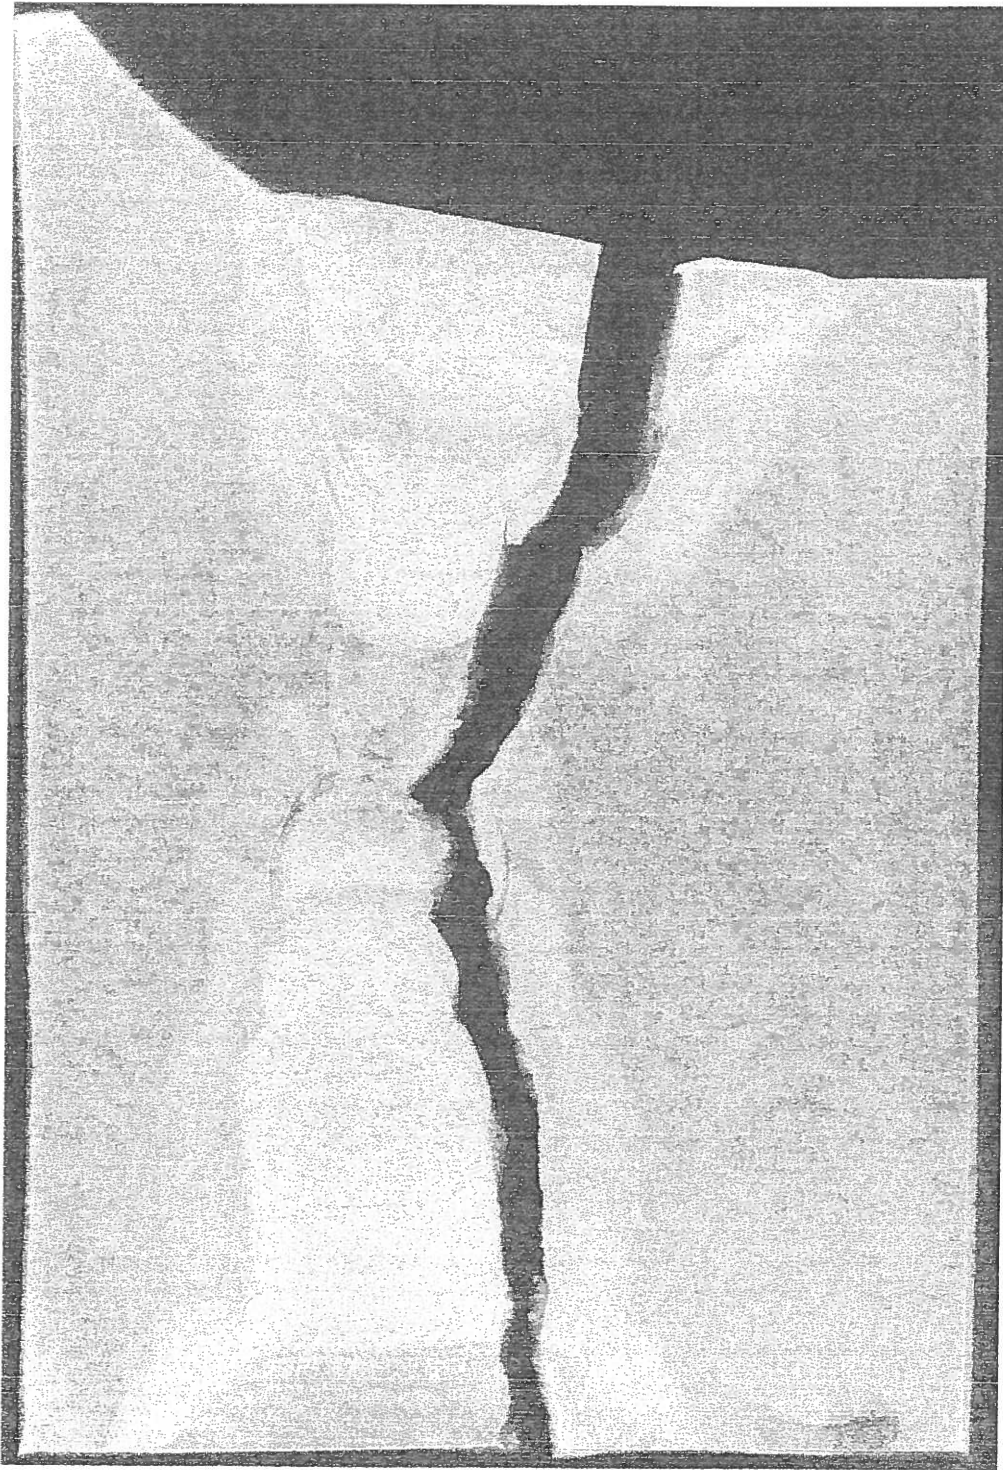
Macrograph of the welding joint of the left fork.
